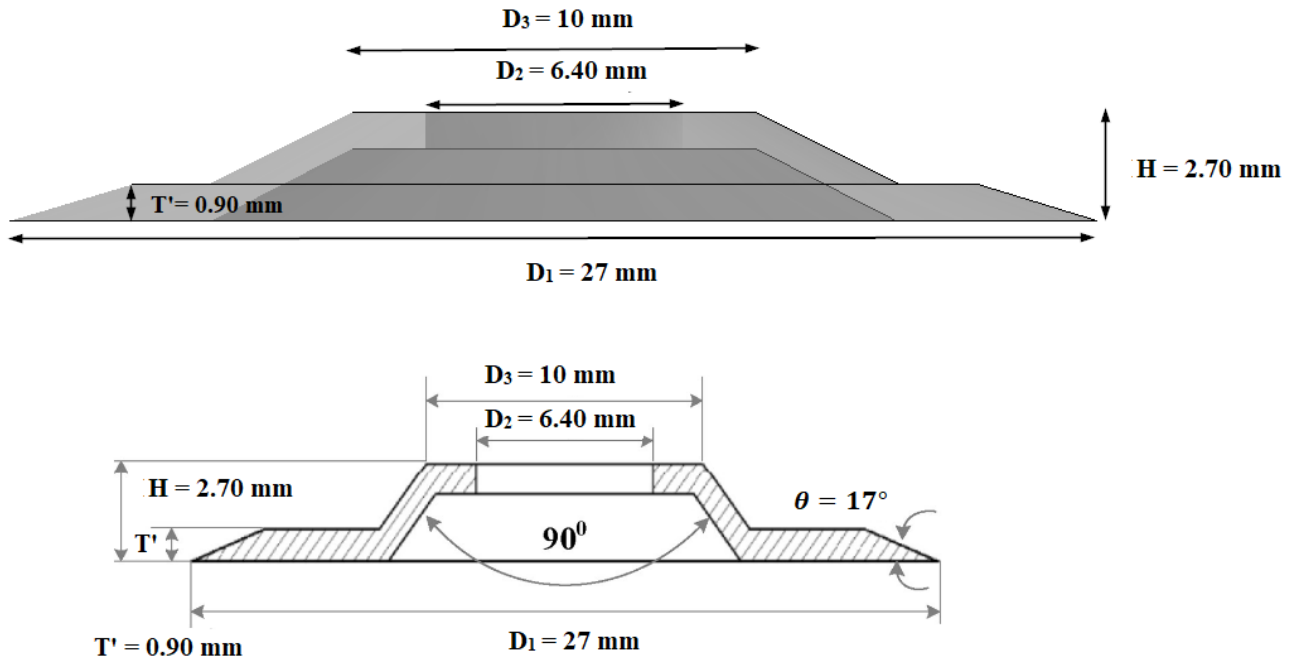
The geometric dimensions of the UCK cutting tool [37].
